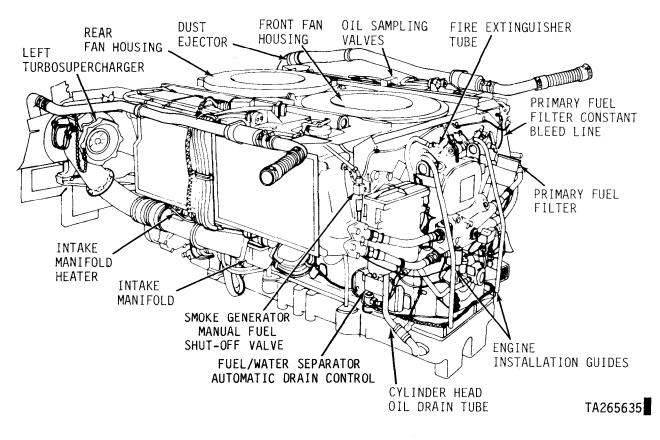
AVDS-1790-2DA engine assembly left front view.
